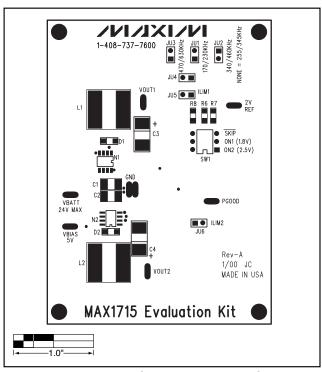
MAX1715 EV Kit Component Placement Guide—Component Side
